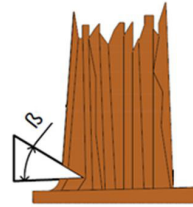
Chipless cutting scheme β -cutting wedge angle.
